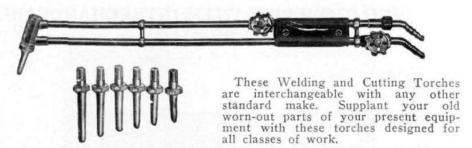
Welding Torch, Type "A," 20" long, with 7 welding tips, price \$......
